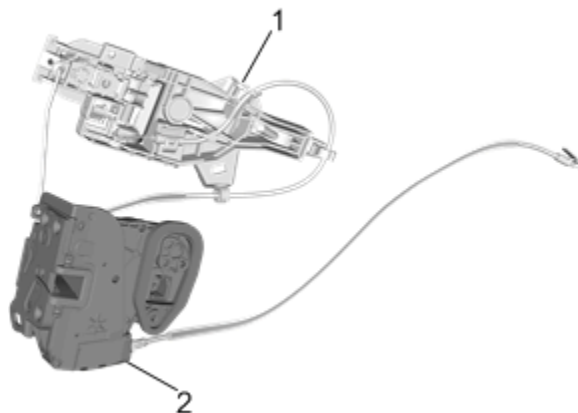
Rear Door Outside Handle Bracket And Rear Side Door Latch
